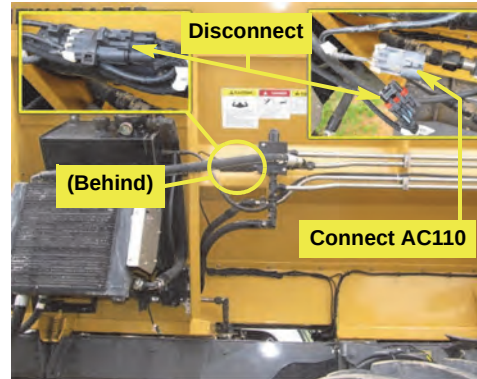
ii: Connecting the belt valve (servo/Fast Valve)
